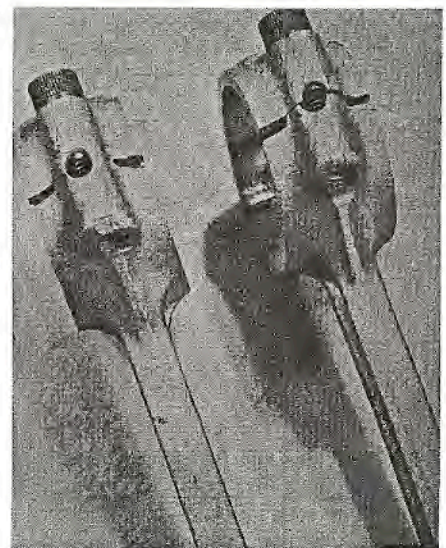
Assembled views of fractured connecting rod showing correct and incorrect cap installations.
